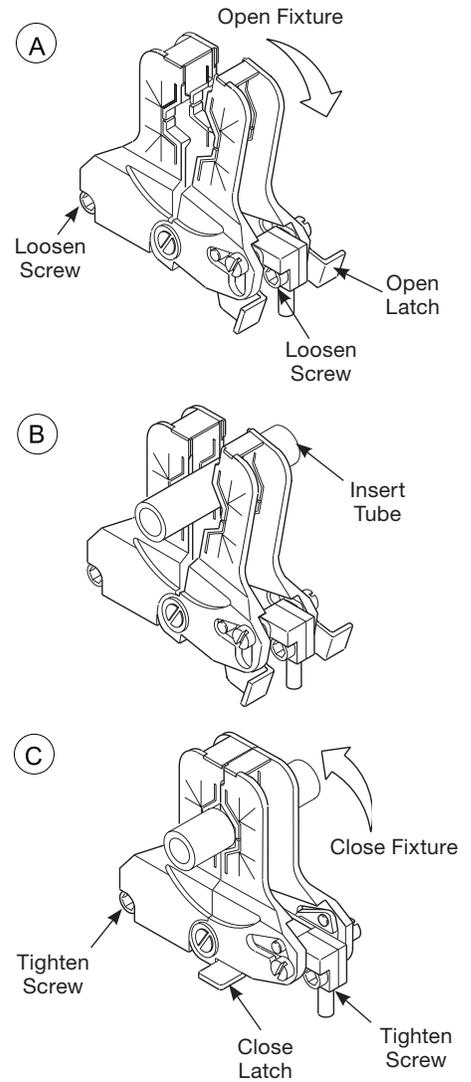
Aligning the Tubing in the Series 4 Micro Weld Head Fixture
